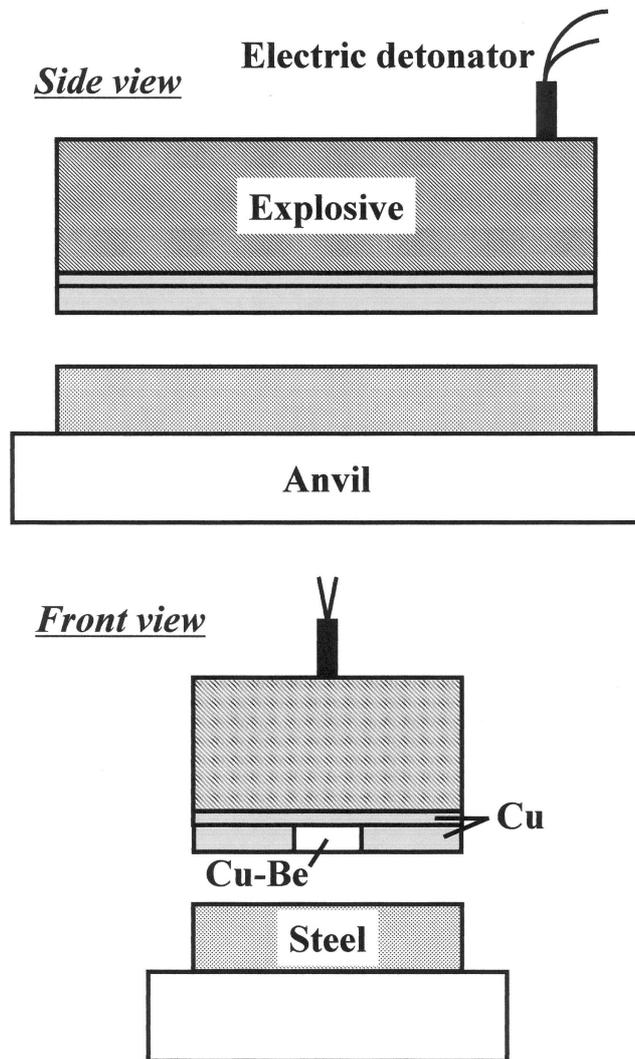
Schematic illustration of experimental assembly for explosive welding.
